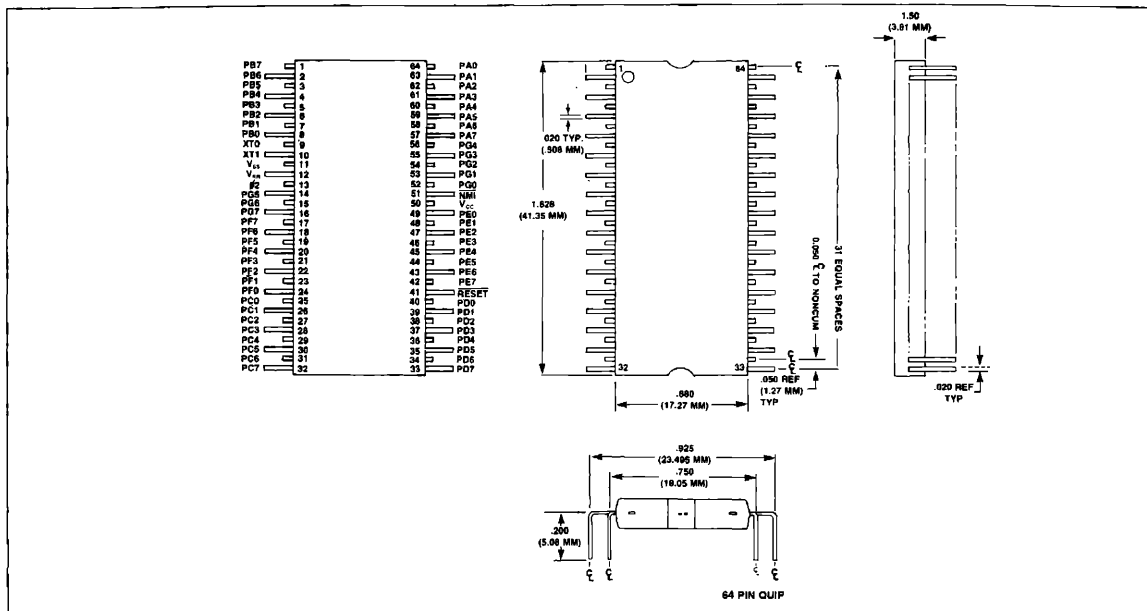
R6500/12 Mechanical Outline and Pin Out Configuration
